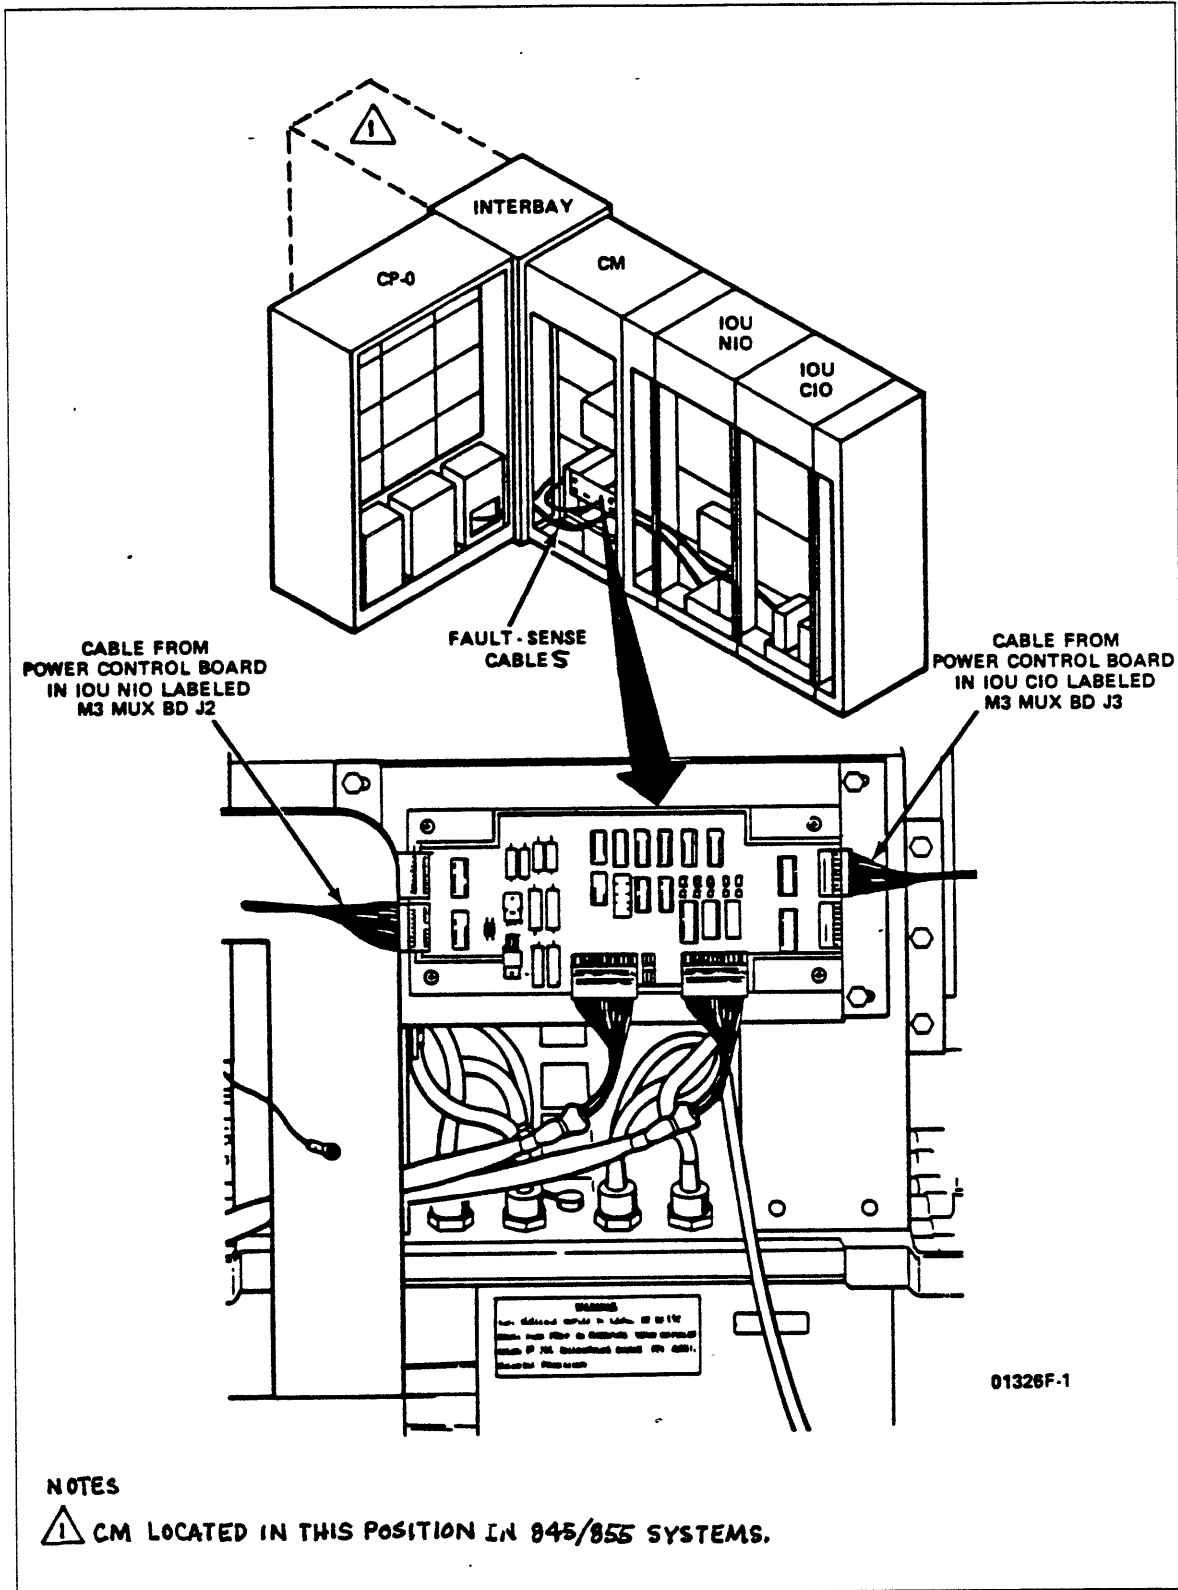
Fault-sense Cable Connections to BS213-A CM Multiplexer Board
